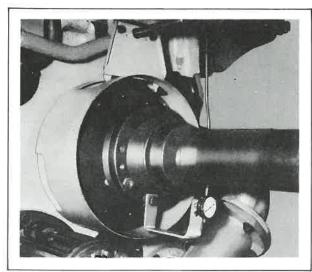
CHECKING ALIGNMENT BETWEEN DRIVESHAFT AND DIESEL ENGINE.
